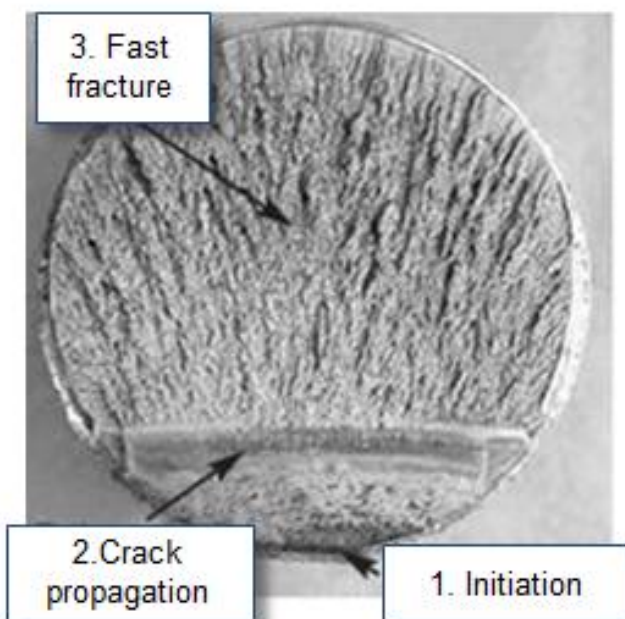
Fatigue fracture (Madusanka, 2007)
